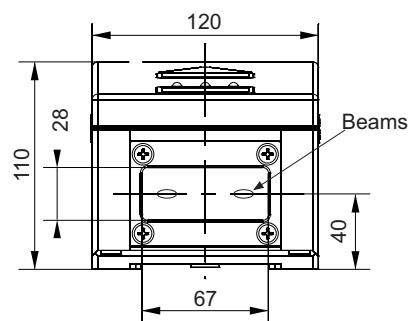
Front view of the LSV-1000 (Dimensions not specified are given in mm)
